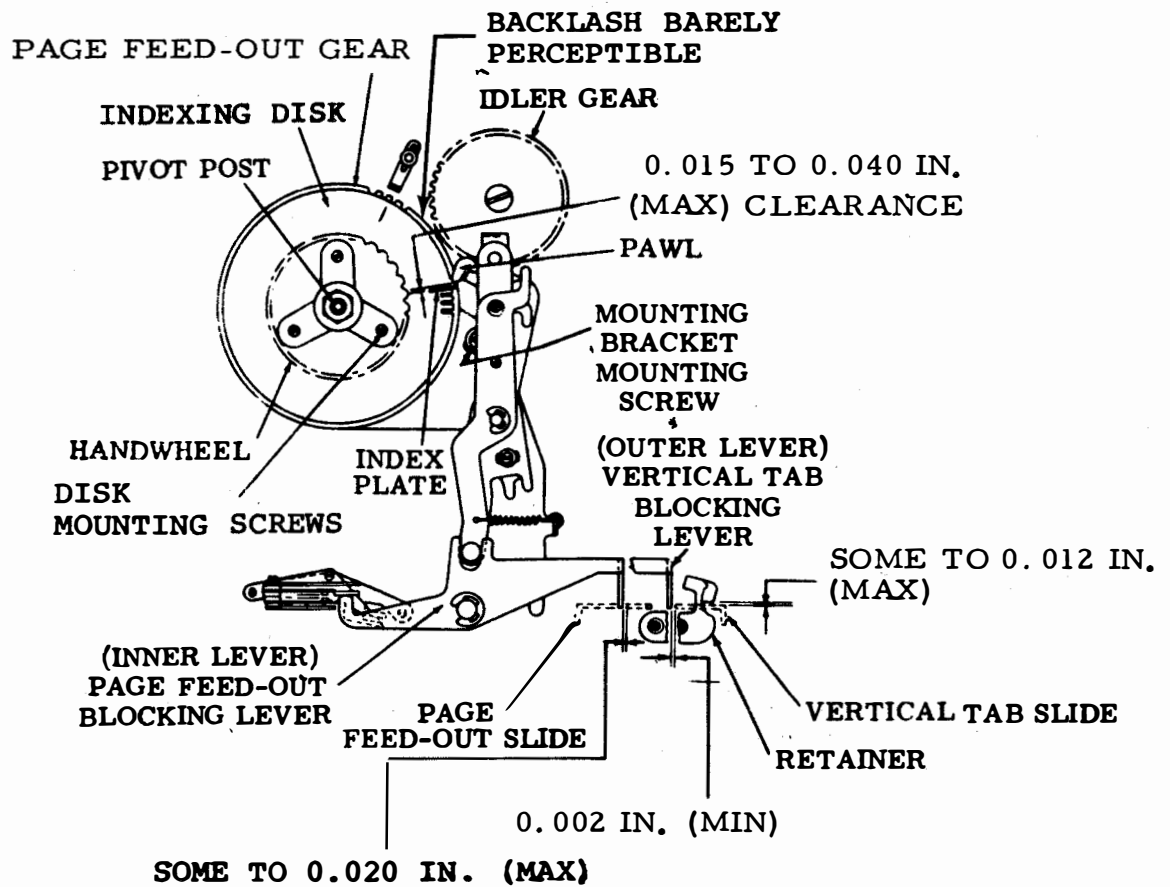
Page Feed-Out Gear Play, Mounting Bracket, Indexing Disk, and Vertical Tabulator Slide Retainer, Left Side View
